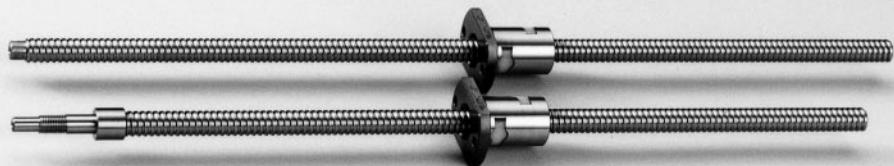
•5 V Series RMA finished shaft end RMS blank shaft end
